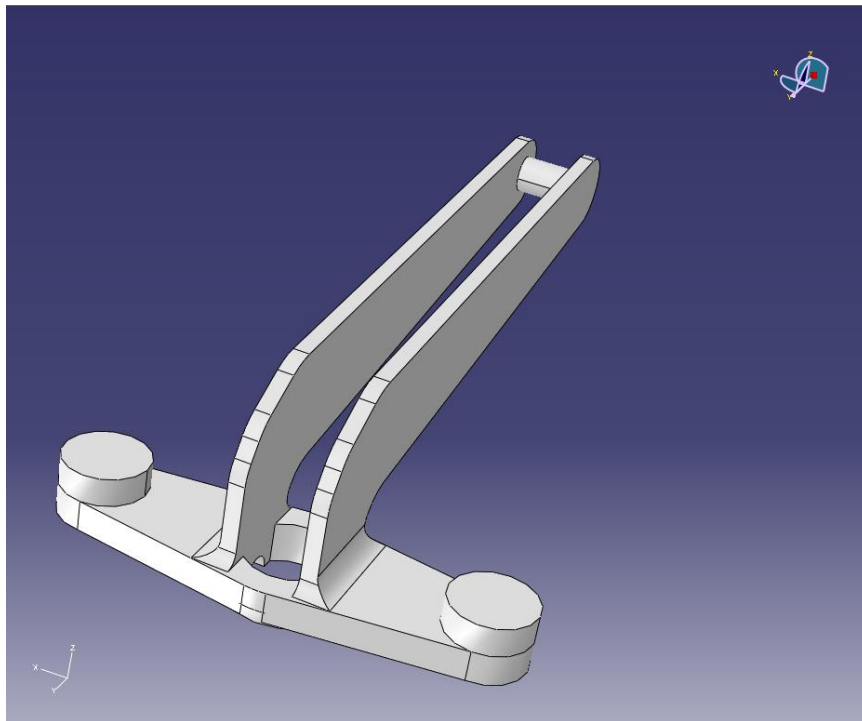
Illustration of the upper part which holds the lever and hydraulics in place.
